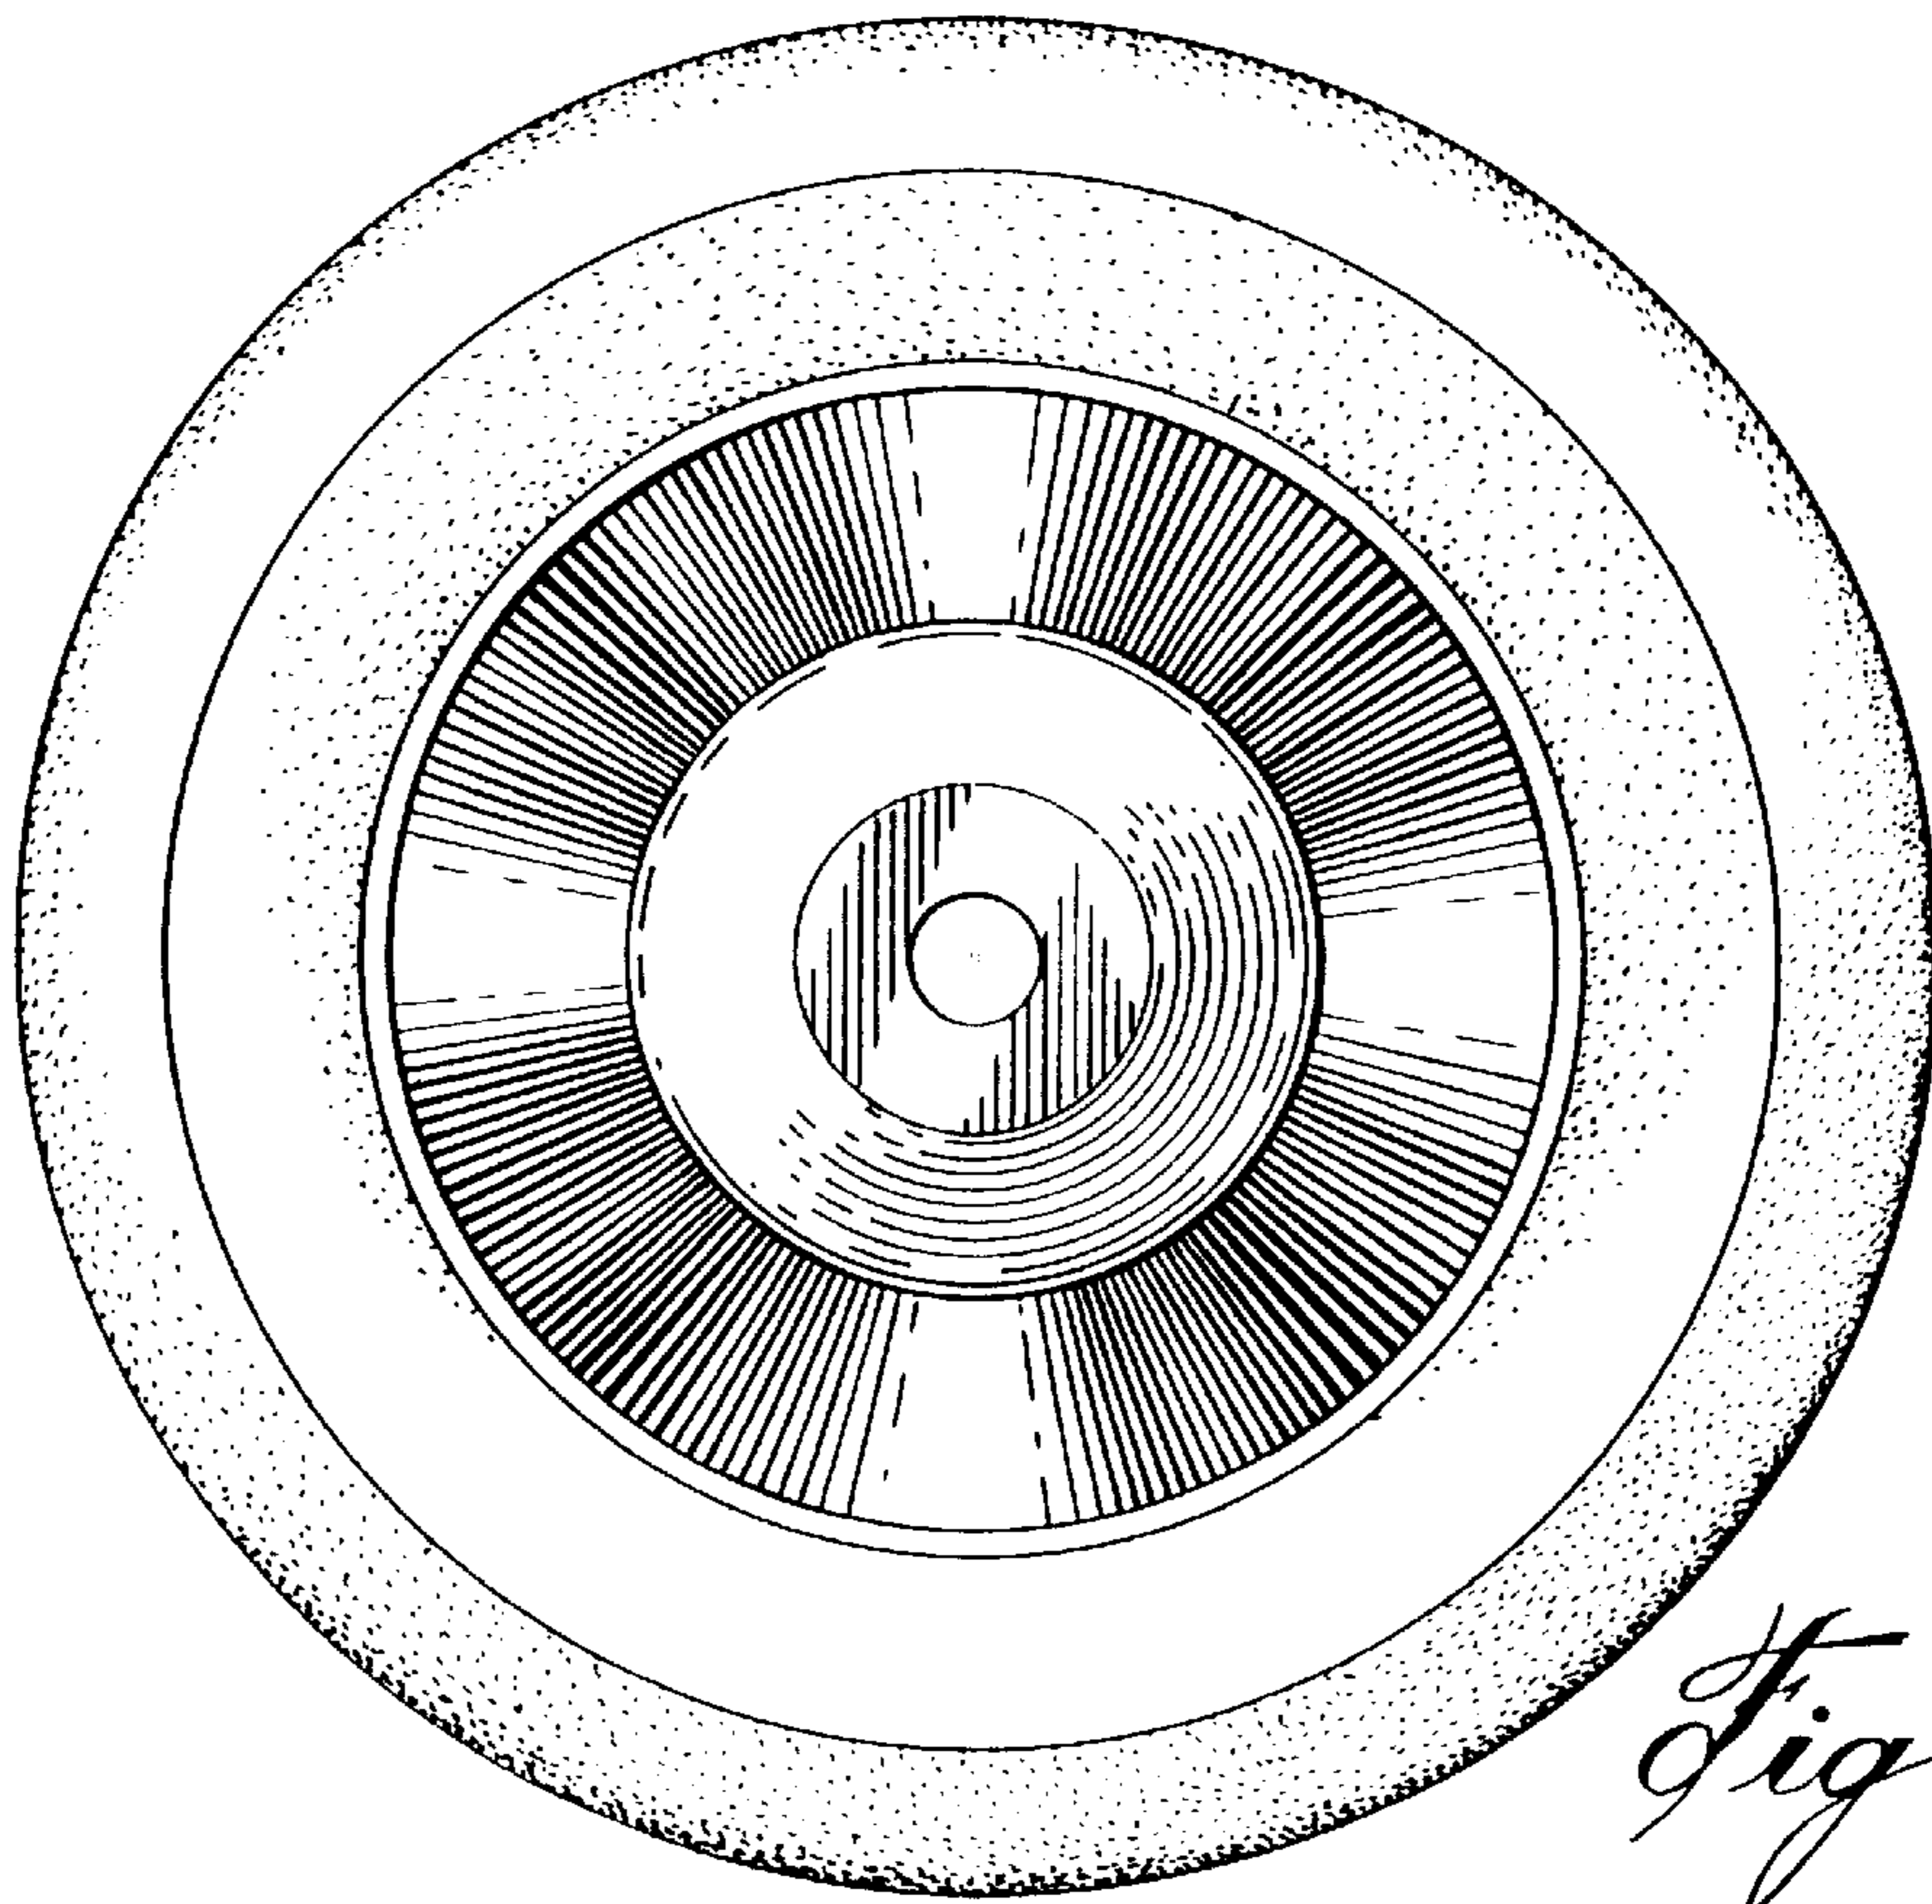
is a perspective view of a shopping cart wheel showing the hub design;
